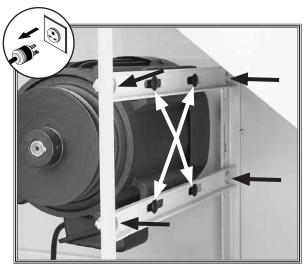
Motor bracket bolts (black arrows) and motor mount bolts (white arrows).
